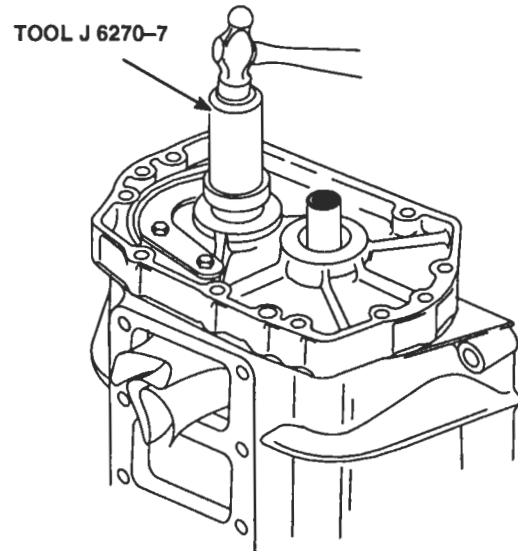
Installing Ball Bearing on Rotor Shaft and in Rear End Plate
